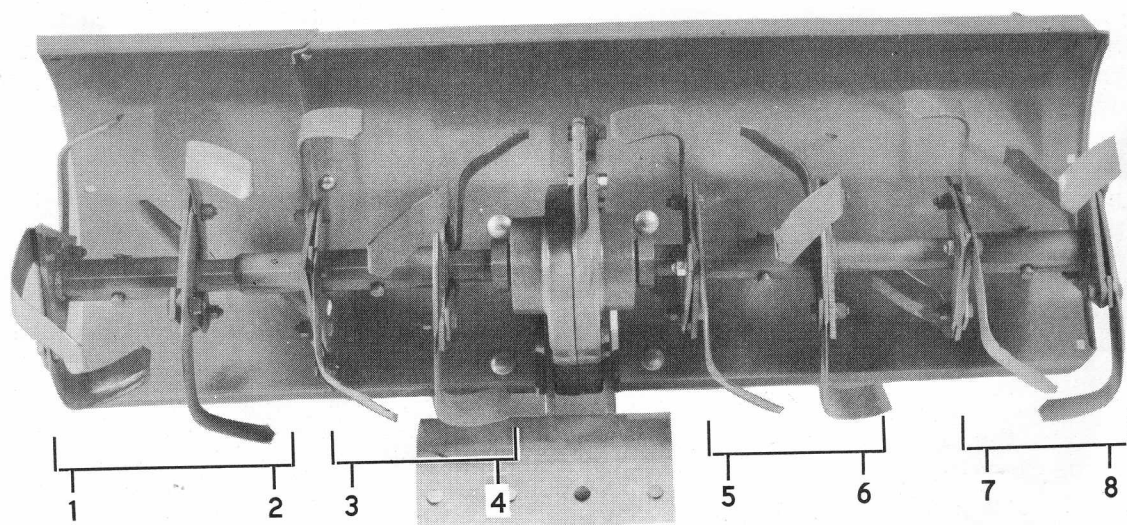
Tine Sections as Assembled at the Factory with Extension on Left Side to Till Out Both Wheel Tracks
